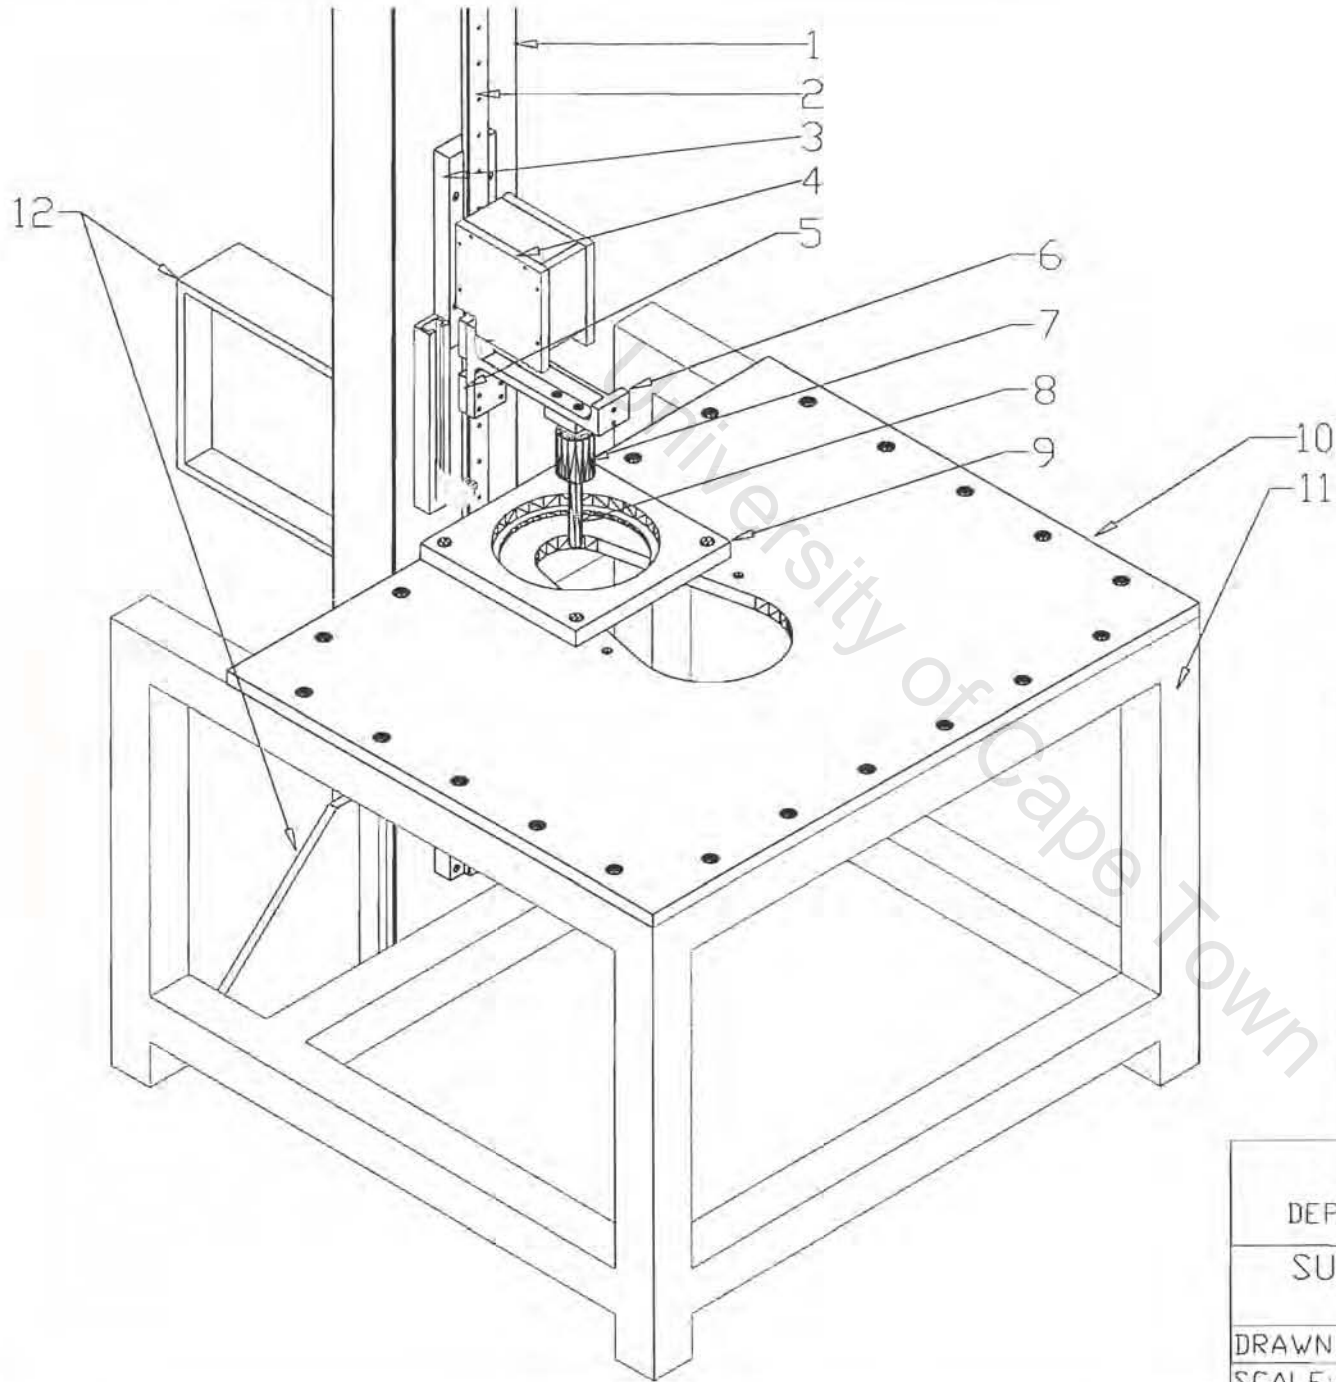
The specimen clamping base and clamping plate for the ASTM compliant system.
